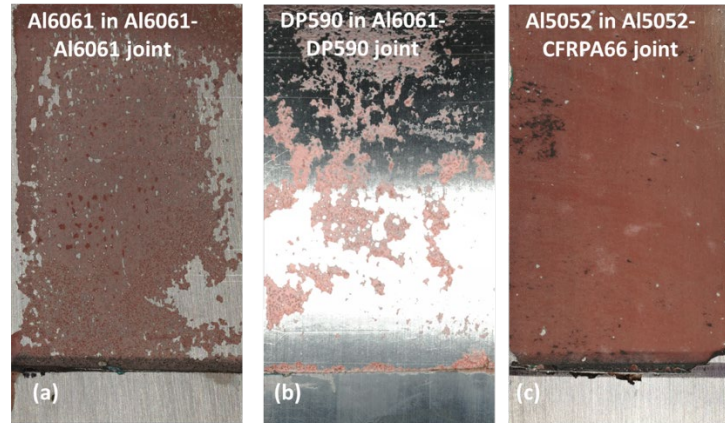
Surface morphologies of (a) Al6061 in Al6061/Al6061 joint, (b) DP590 in Al6061/DP590 joint, and (c) Al5052 in Al5052/CFRP-PA66 joint after DCB failure. Sample were tested after 1400 hours of exposure in a condition of 98% RH and 35 °C. Source: PNNL.
